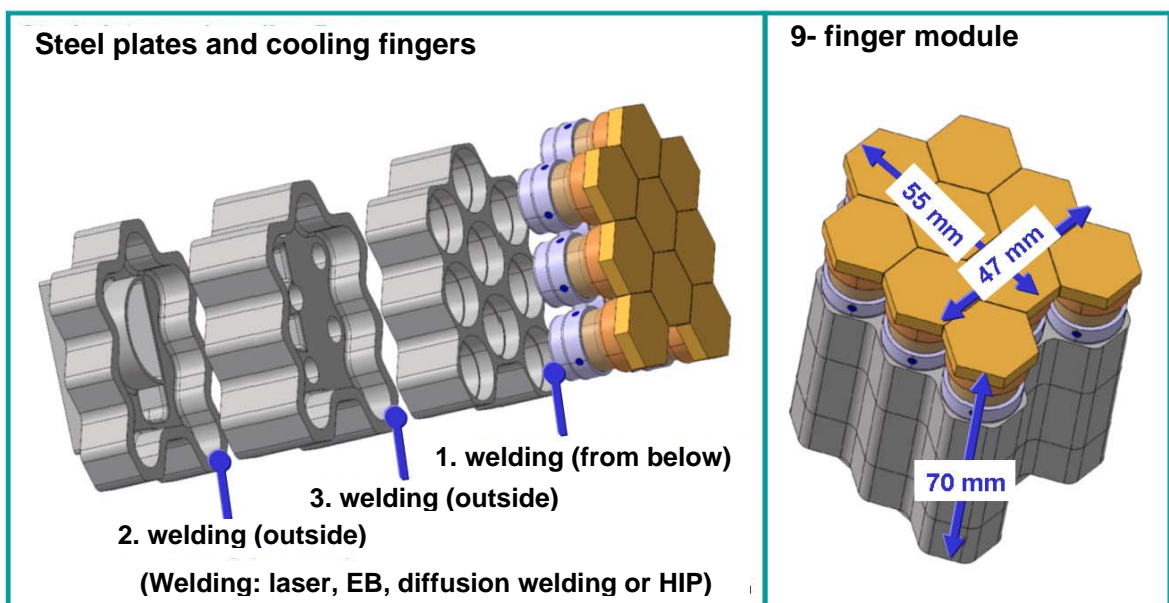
Multiple cooling finger housing, steel-tungsten joints.
